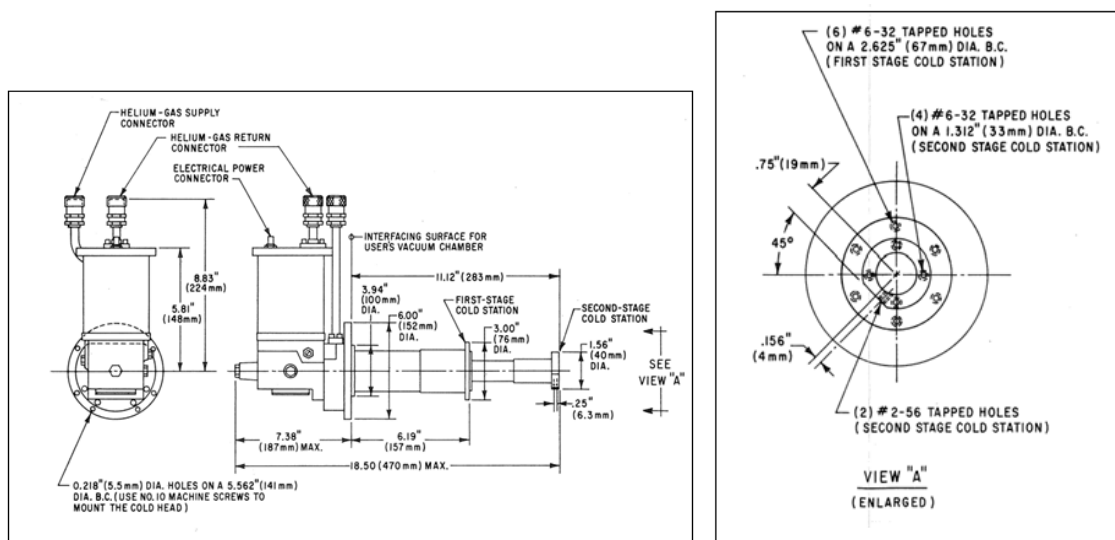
Dimensional details and the installation Interface of the model 350C cold head
